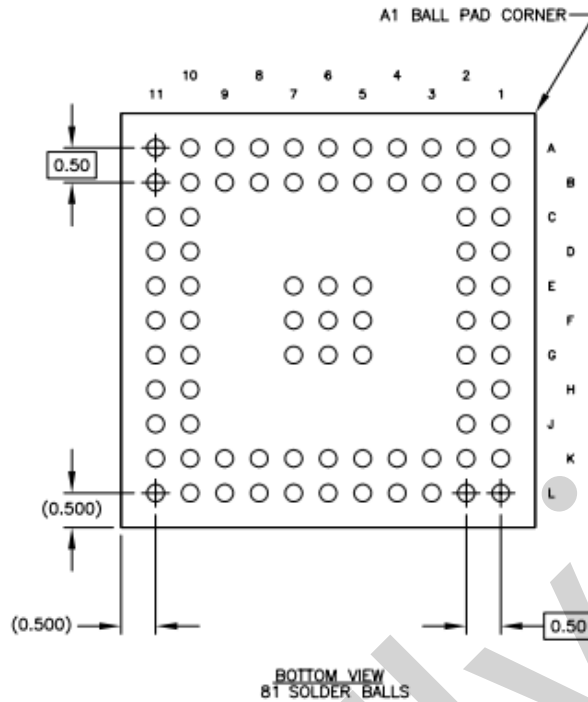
HF-SIP120 BGA 6 x 6 mm Package Dimensions
